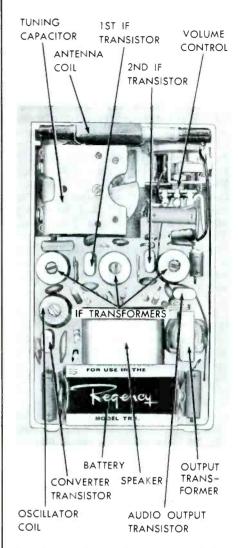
Rear View of Regency Model TR-1 Showing Layout of Components.
